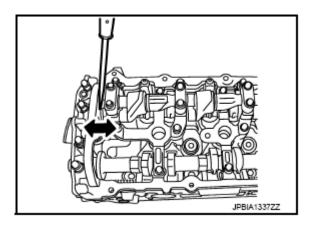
Measuring Drive Shaft End Play Using Dial Indicator Courtesy of NISSAN NORTH AMERICA, INC.
